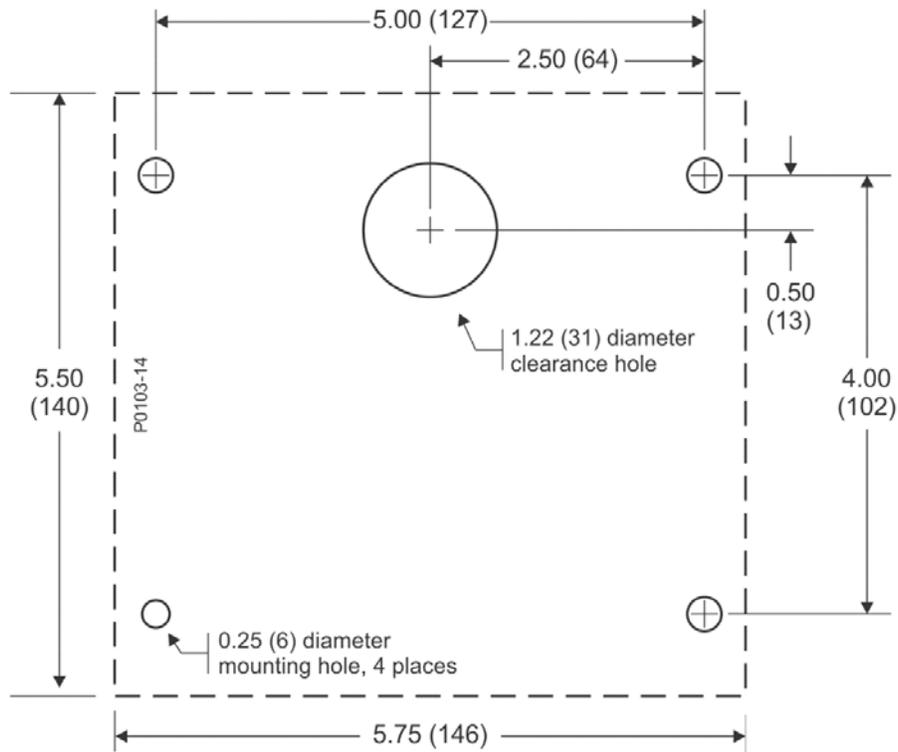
Drilling Dimensions for Remote Mounting of Front Panel
